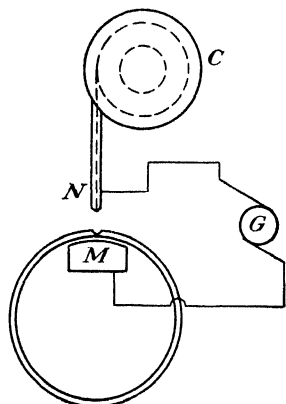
XV.—Sketch showing the method of metallic arc welding. (From *Iron Age*.)
